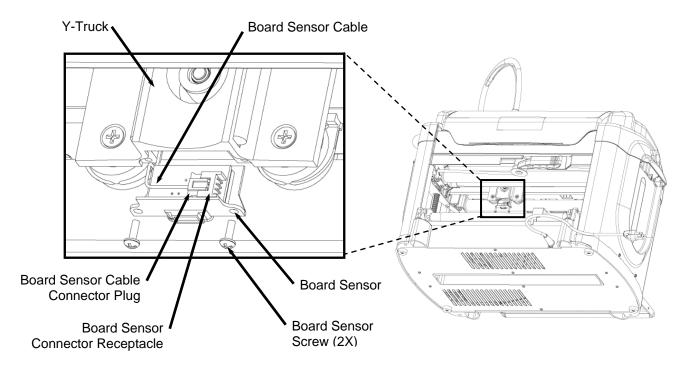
REMOVAL OF THE BOARD SENSOR
